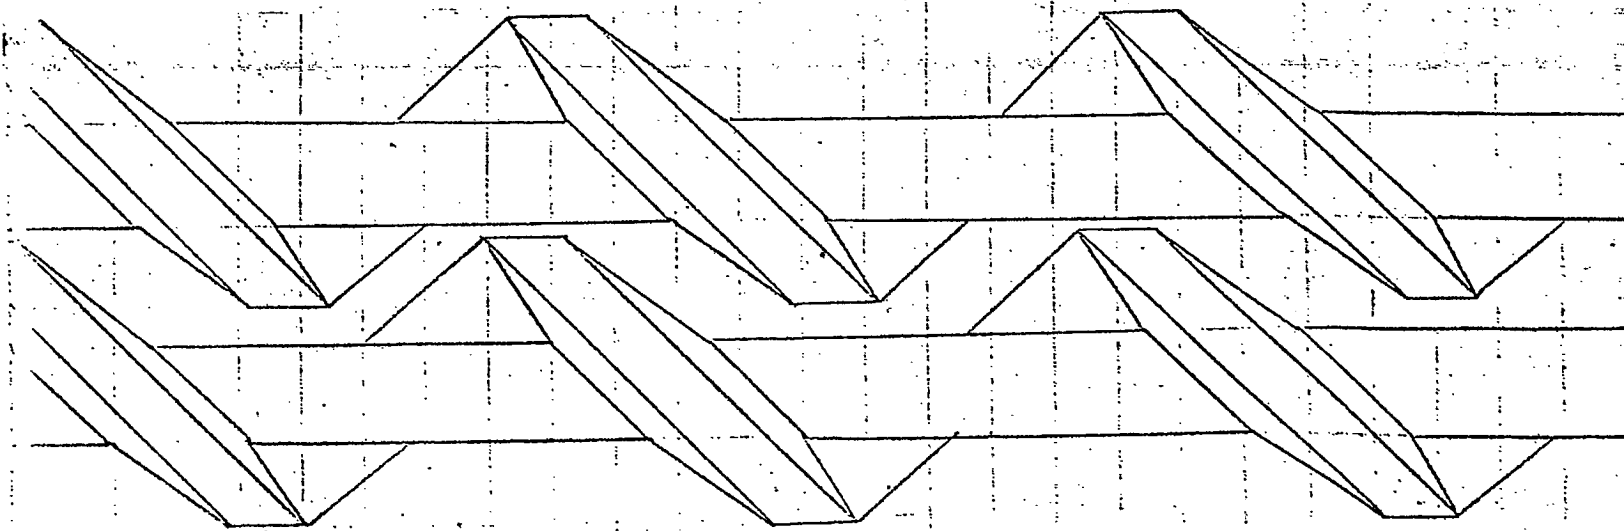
MIXER - FEEDER FOR COAL AND CHAR
